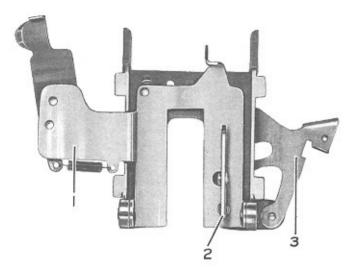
No. 11946-A Selector Slide and Cancel Plate Assembly (Front View)
